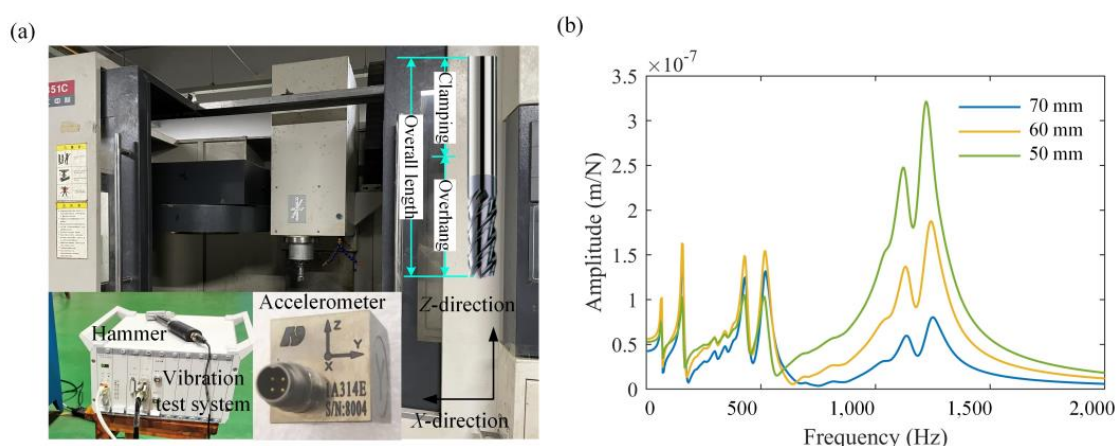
(a) The studied vertical machining center and the testing instrument; (b) the Y-directional tool point FRFs with different tool clamping lengths.
